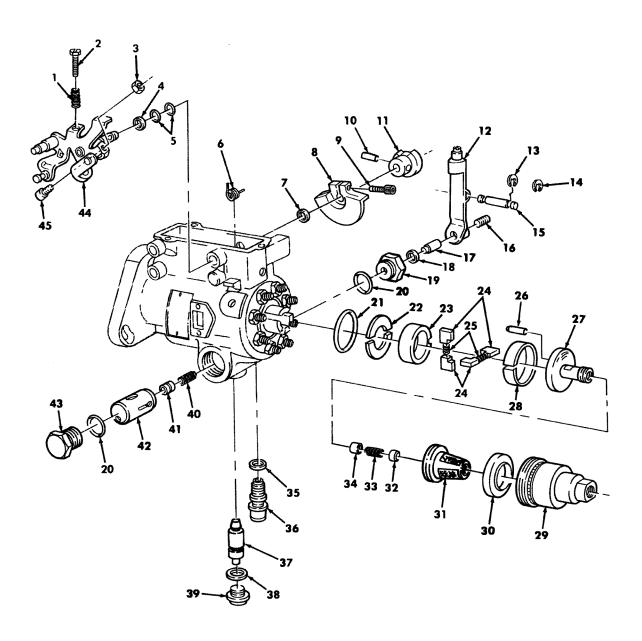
Fuel Injection Pump Throttle Shaft, Regulator, Transfer Pump, and Related Parts.
